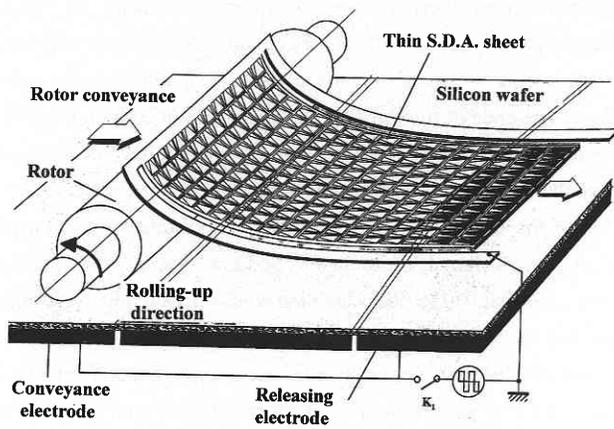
Hybrid fabrication principles of a macroscopic tubular motor.
